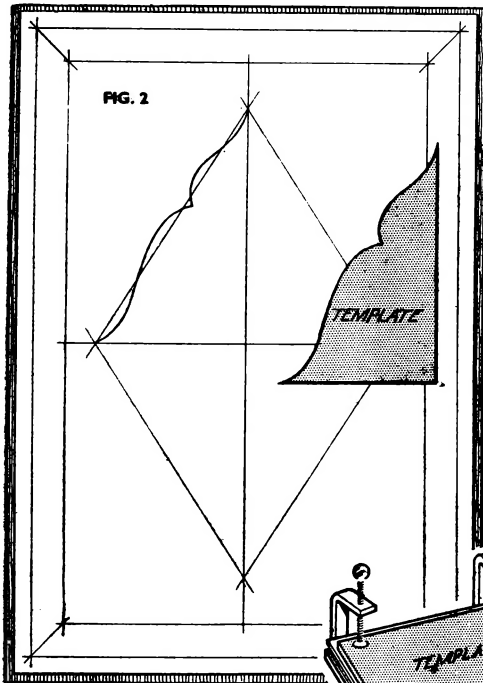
PRELIMINARY DRAWING AND TEMPLATE.
